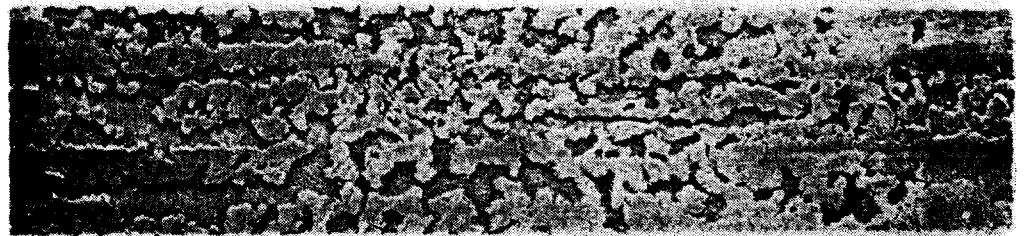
IN CONTINUATION OF FIG. 17, THE REDUCTION IN AREA OF THE LOWER BEARING BY FATIGUE BREAKOUT RAISES UNIT LOADING ON THE REMAINING AREA AND ACCELERATES FATIGUE FAILURE OVER THE ENTIRE BEARING SURFACE
